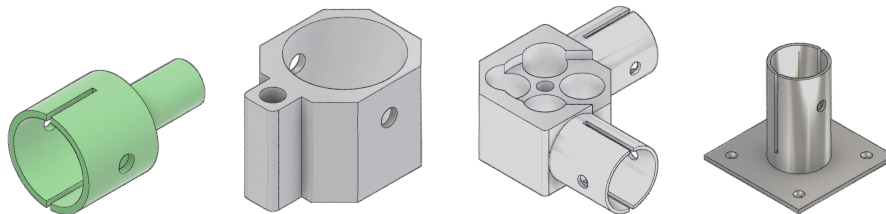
Three-dimensional technical drawing of all the connectors used in the mount v2. From left to right: antenna connector, angled connector, square connector, and baseplate connector.
